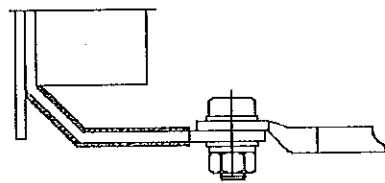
Drawing of bolted electrical connection; beginning of winding at the bottom of the coil
